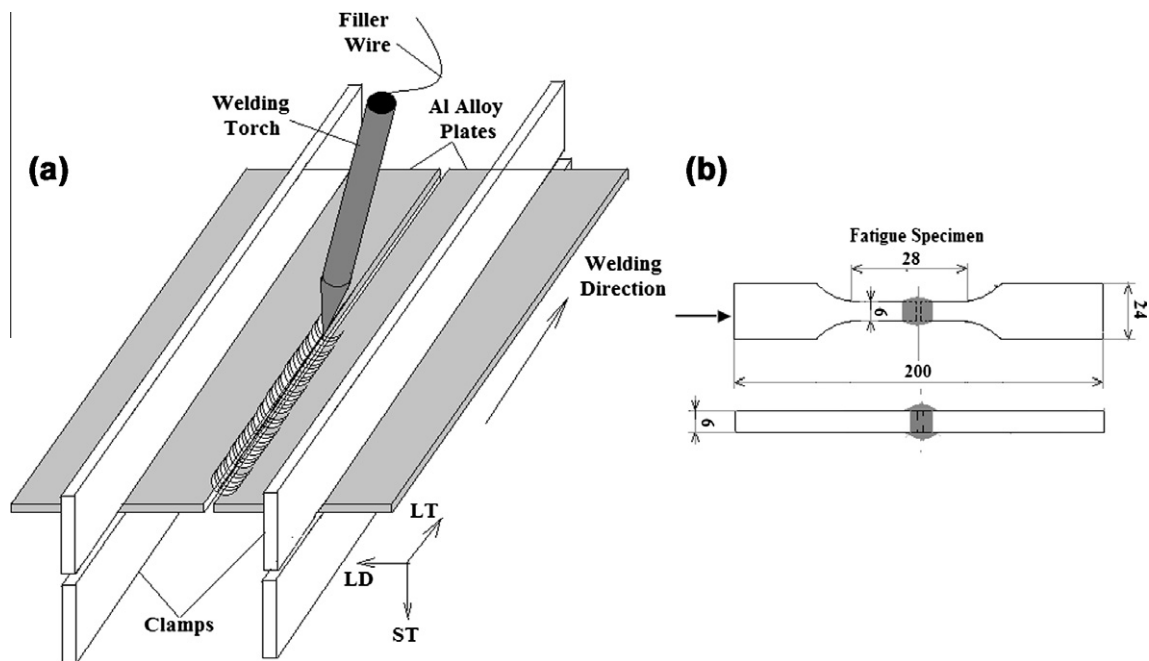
(a) Schematic illustration of the experimental set-up during welding; and (b) fatigue specimen preparation (dimensions in mm).
